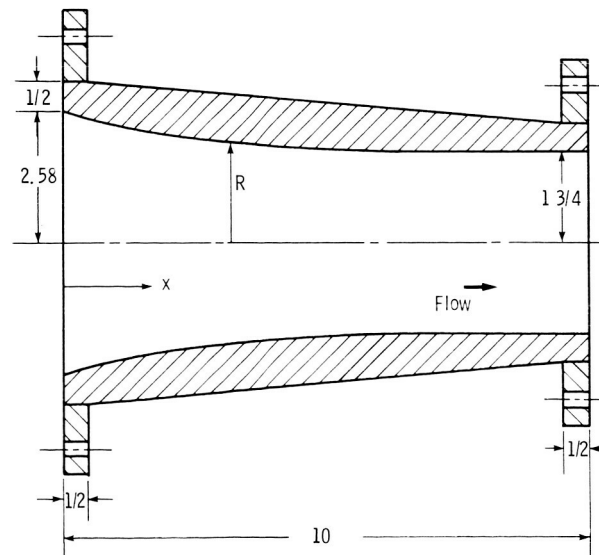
Details of flanged nozzle. (All dimensions in inches.)
